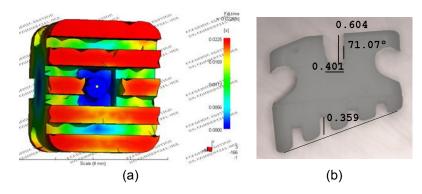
Injection moulded bracket: (a) Mould filling behaviour and (b) sintered part.
